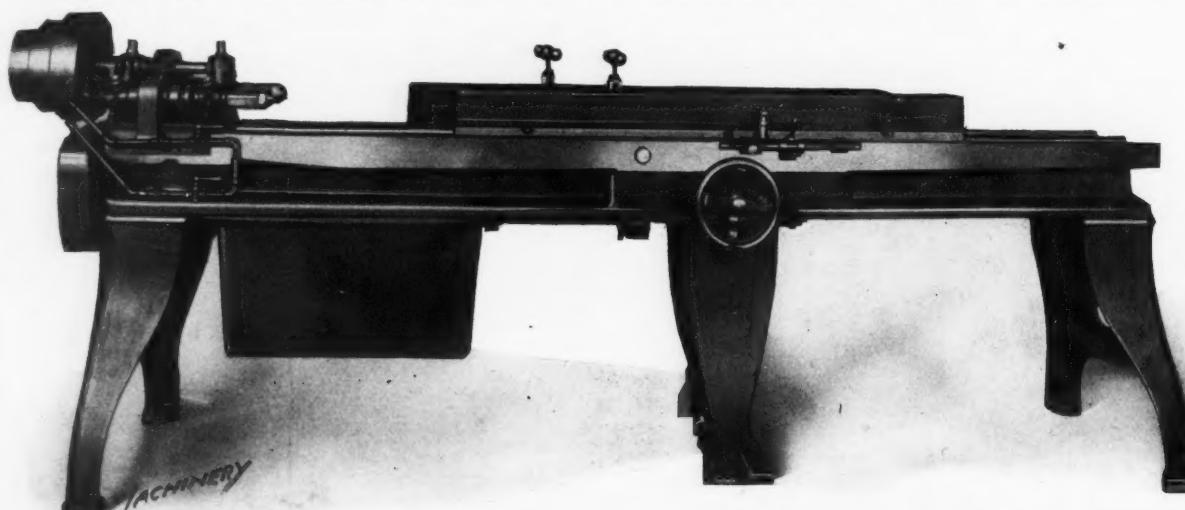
Rifle Barrel Reaming Machine built by the Diamond Machine Co.
